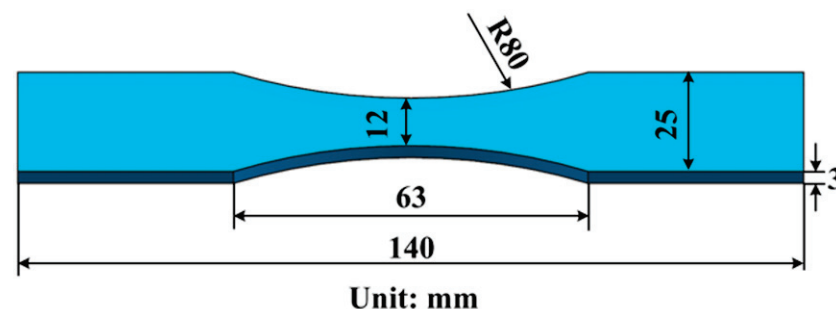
Geometry and dimensions of the 7075-T73 aluminum alloy specimens.
